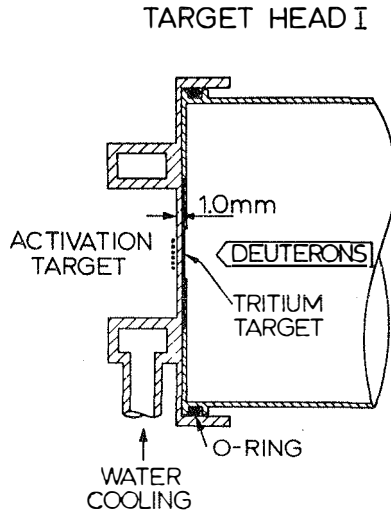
Cross section of the target head I with water cooling. The material is aluminium.
